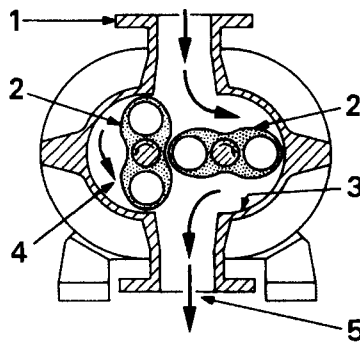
Section through a single-stage lobe blower: (1) inlet, (2) rotors, (3) housing, (4) pump chamber (swept volume), (5) outlet. Reprinted with permission from *Vacuum Technology*, Leybold-Heraeus GmbH, Köln, Germany.
